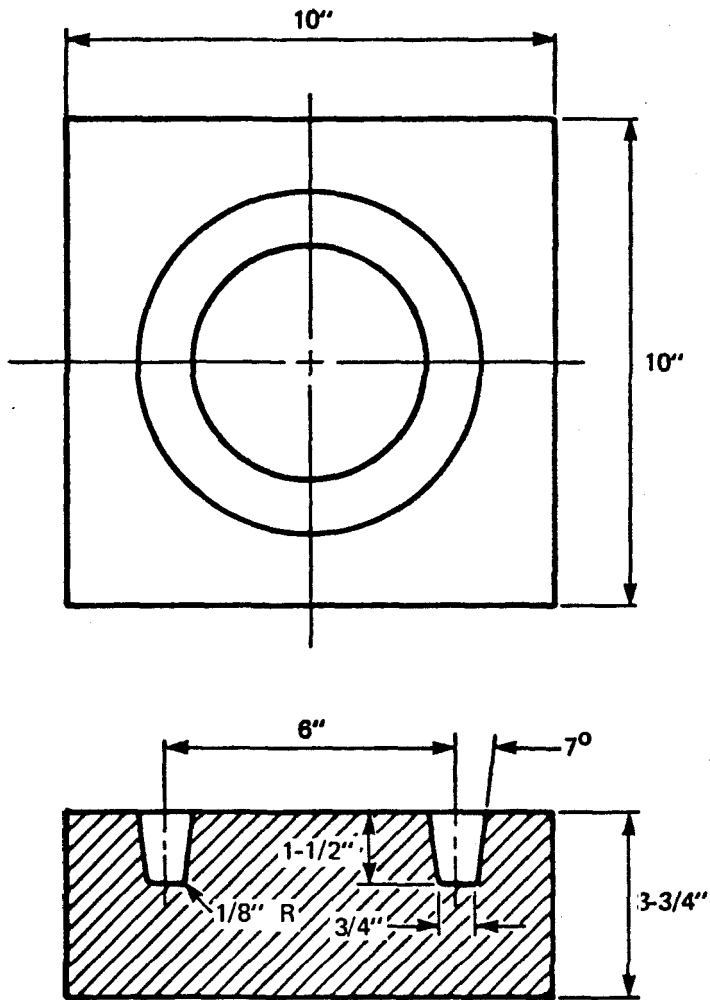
CIRCULAR "U" GROOVE TEST
